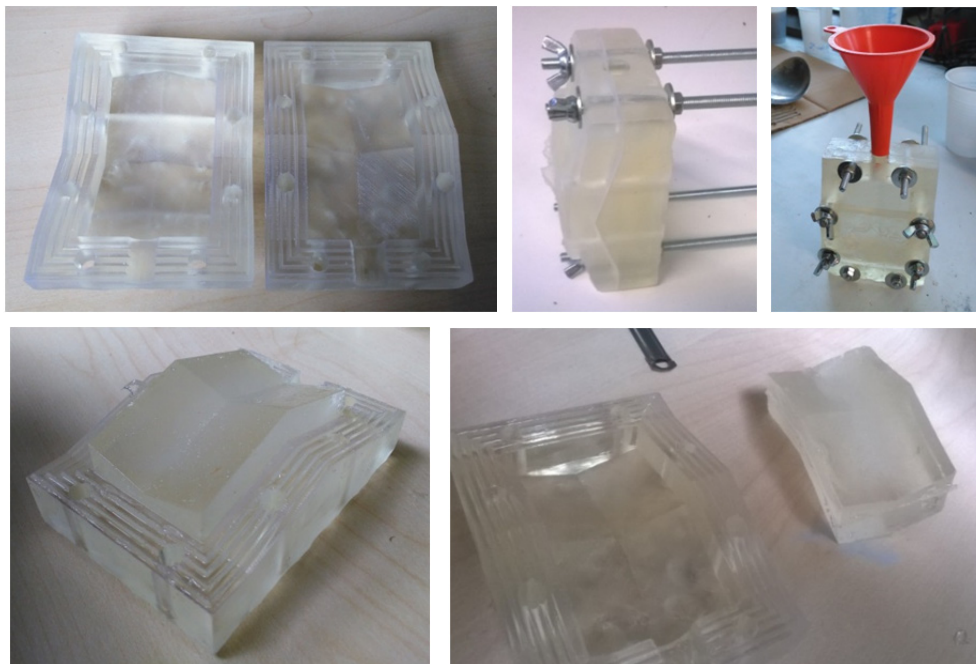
3D printed moulds for exploratory casting experiments with sugar glass.
